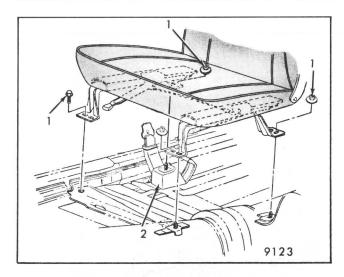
"A" Body Manually Operated Bucket Seats, Except Swivel and "F" Body Buckets (Passenger Side Shown -Driver's Side Typical)
